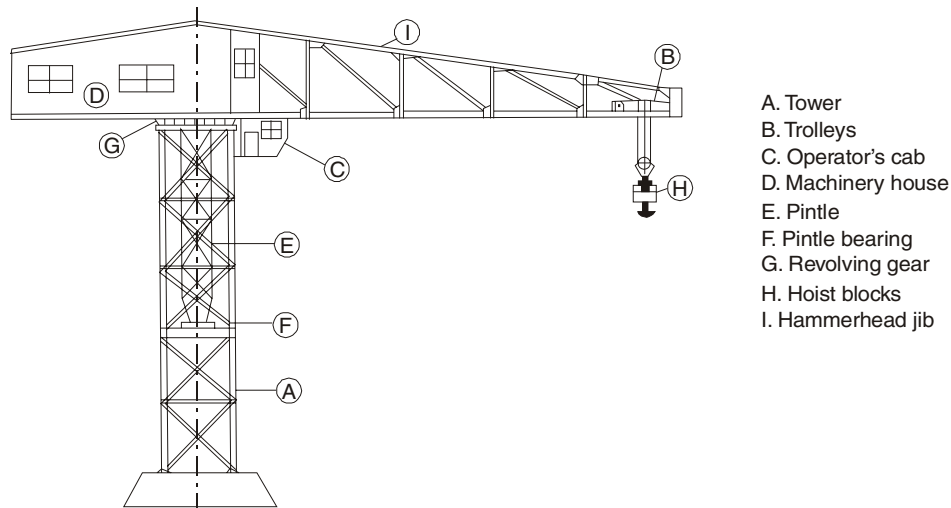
Fixed-tower hammerhead jib crane
